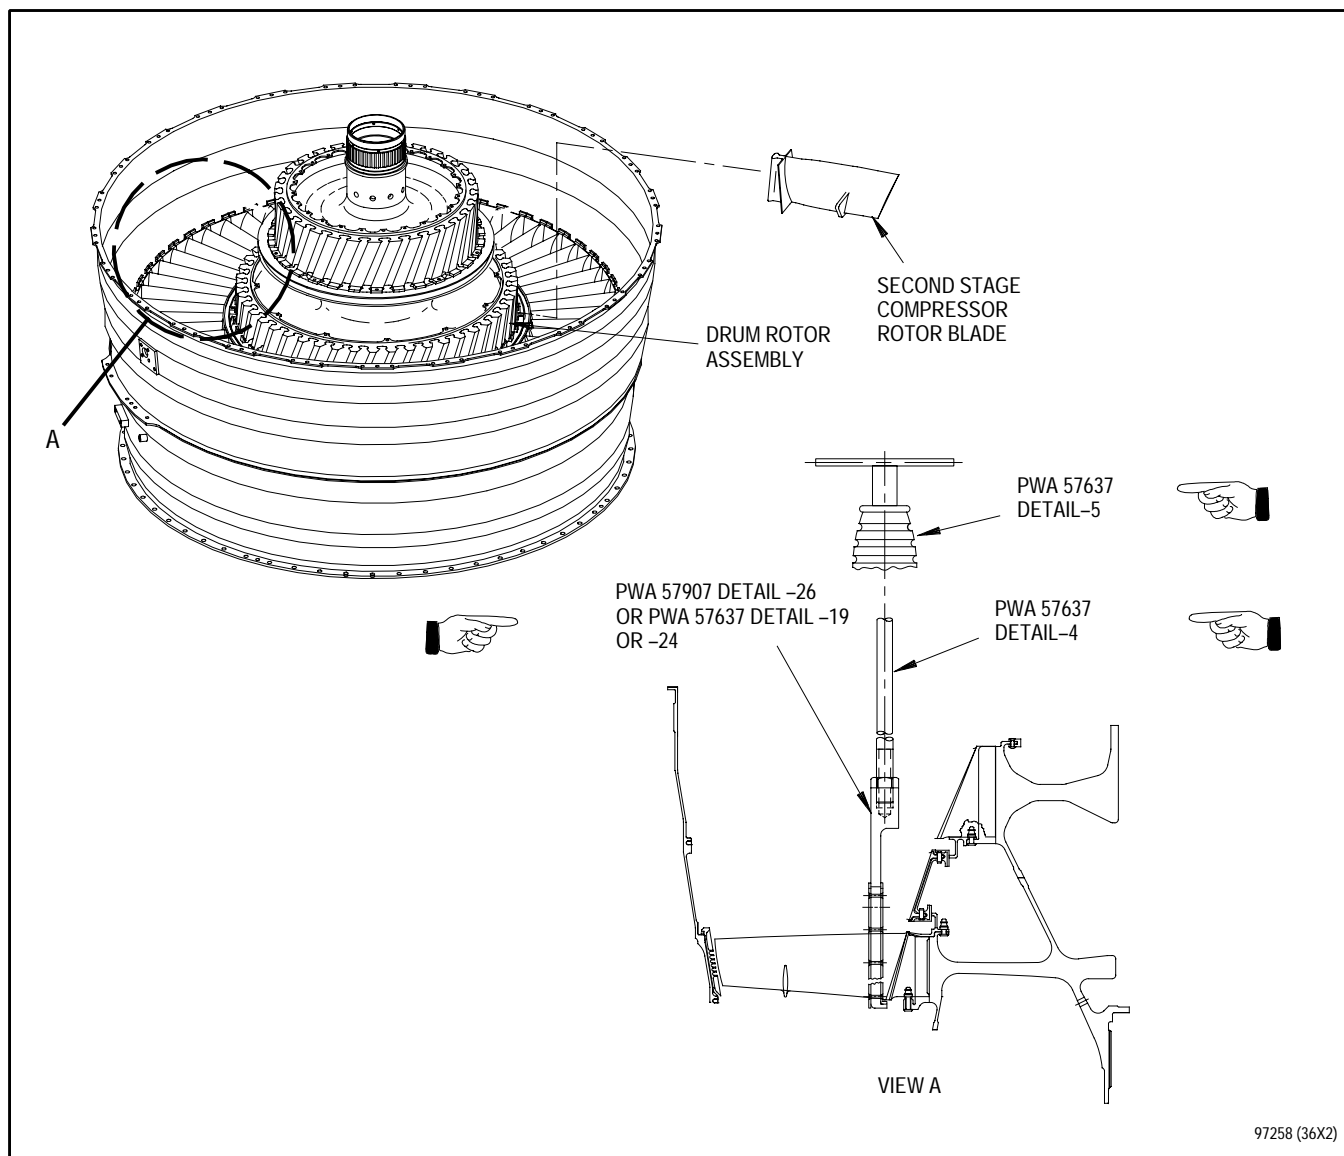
A. Second Stage Compressor Rotor Blades - Removal Using PWA 57907 or PWA 57637 Puller Set
